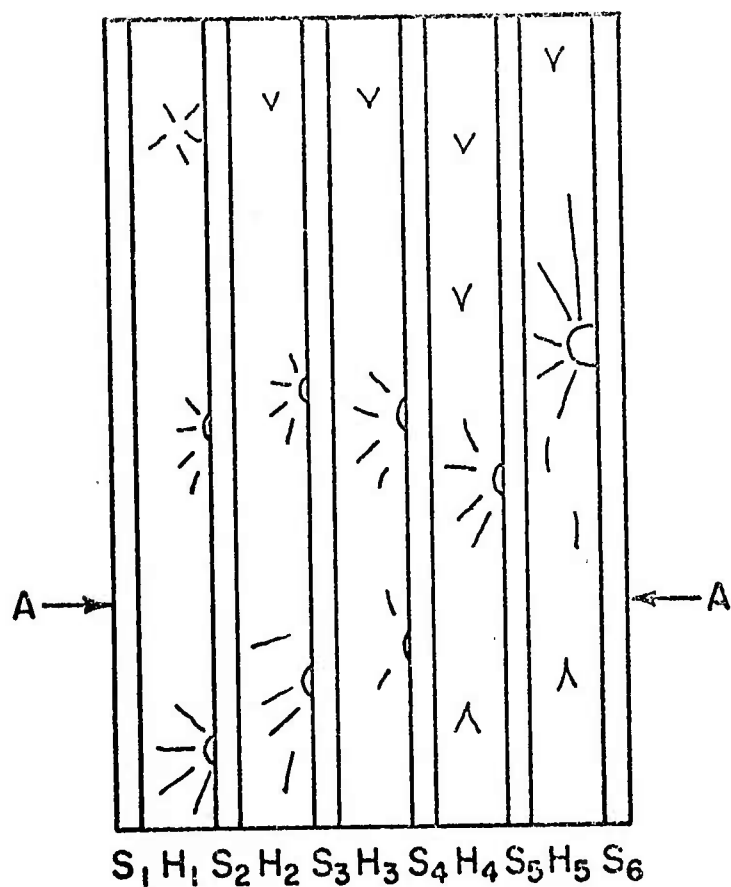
A Schematic Fractograph for Specimen D 332 ($f_s = .25$). Brittle fracture occurred in hard layers and shear fracture occurred in soft layers. Crack originated from H₅ propagating to the left of the specimen. Multiple crack nucleation sites were observed in hard layers.
